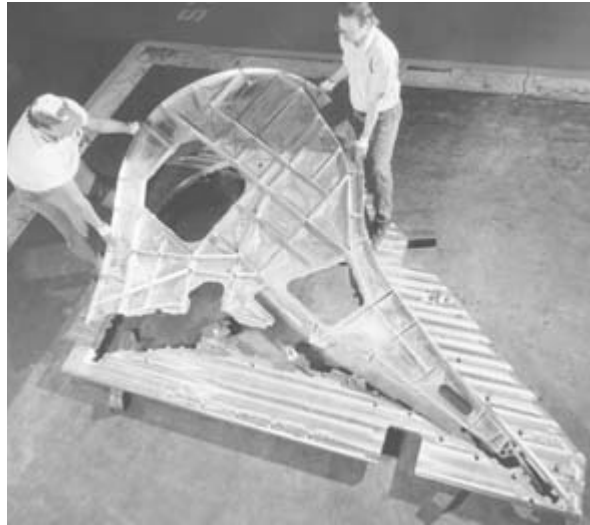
AIRCRAFT COMPONENT MACHINED BY HIGH SPEED MILLING
